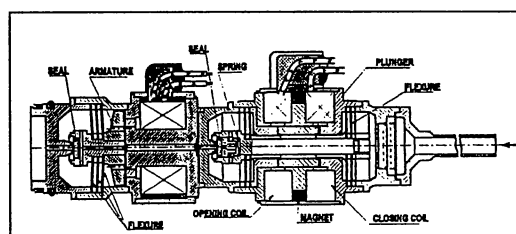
CONTROL VALVE ASSEMBLY WITH UPSTREAM LATCH VALVE
